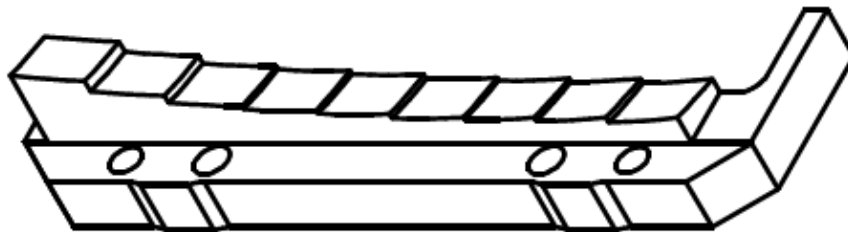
Mechanical Drawing of a Channel 2 Re-Imaging Mirror
